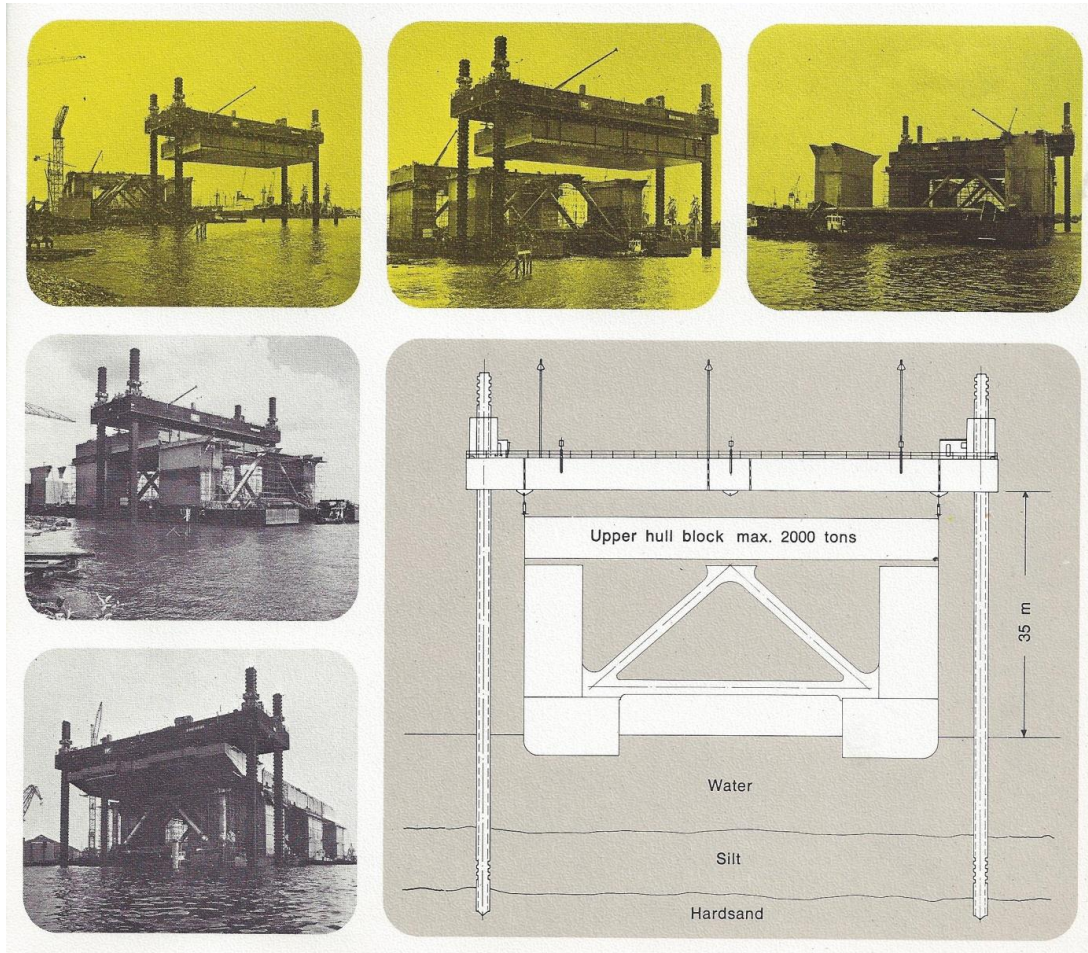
Assembly method *Viking Piper* (GustoMSC)
